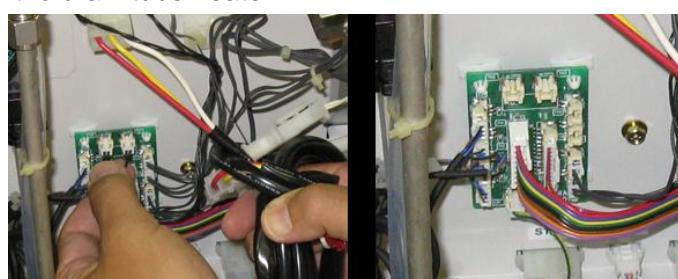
Remove the temperature senor connectors from the right relay board
